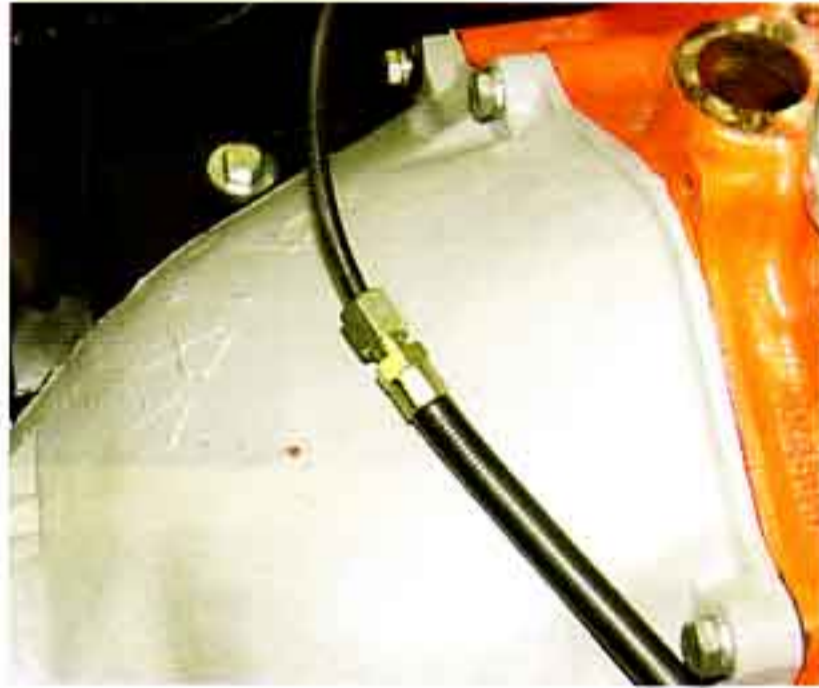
The kickdown cable pin P/N 19-66 bolts to the lower throttle arm.
